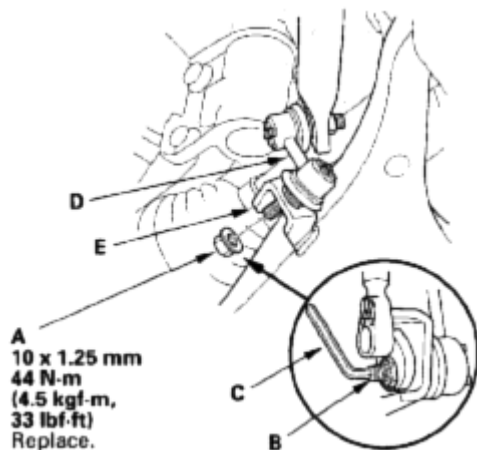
Identifying Joint Pin Flange Nut With Torque Specification
